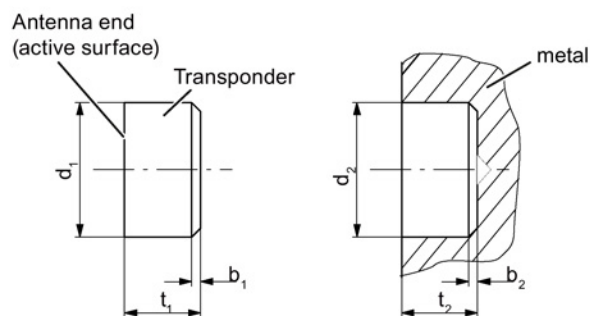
Flush-mounting of MDS D421/D521/E623 in metal with tools
